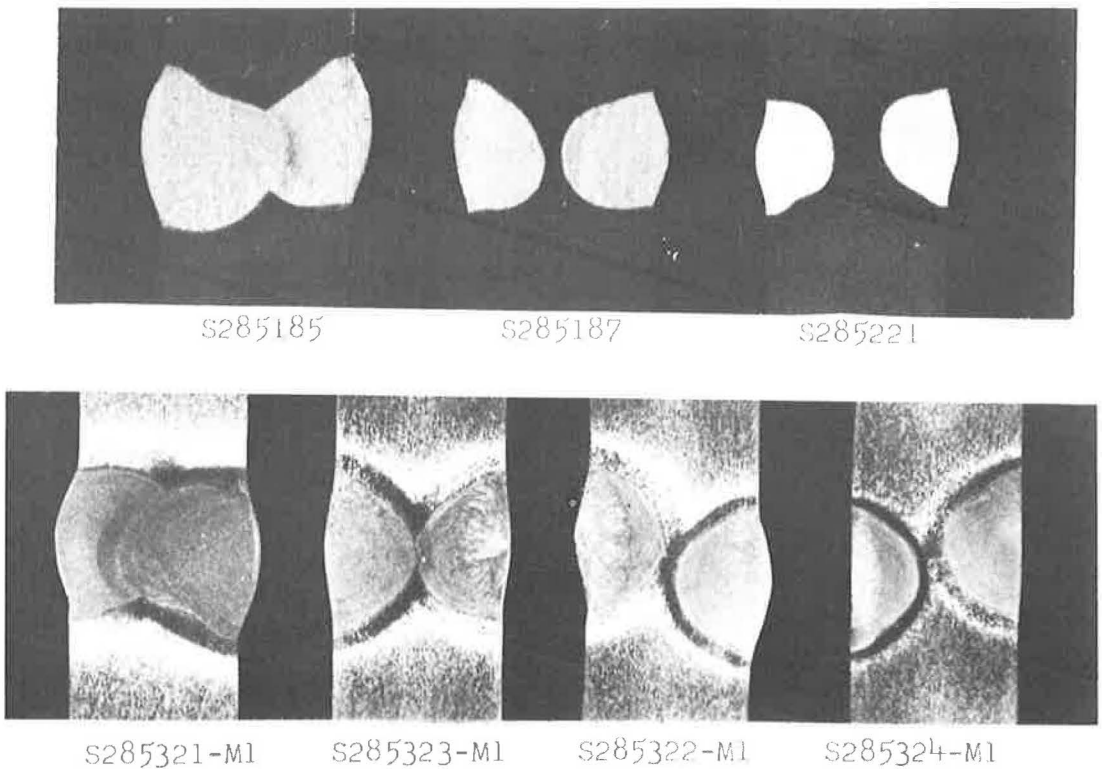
Macrographs of sections through square butt TIG welds in 2219-T87 plate showing various degrees of penetration (mag. 2X, etch: top row 10% NaOH, bottom row Keller's).
